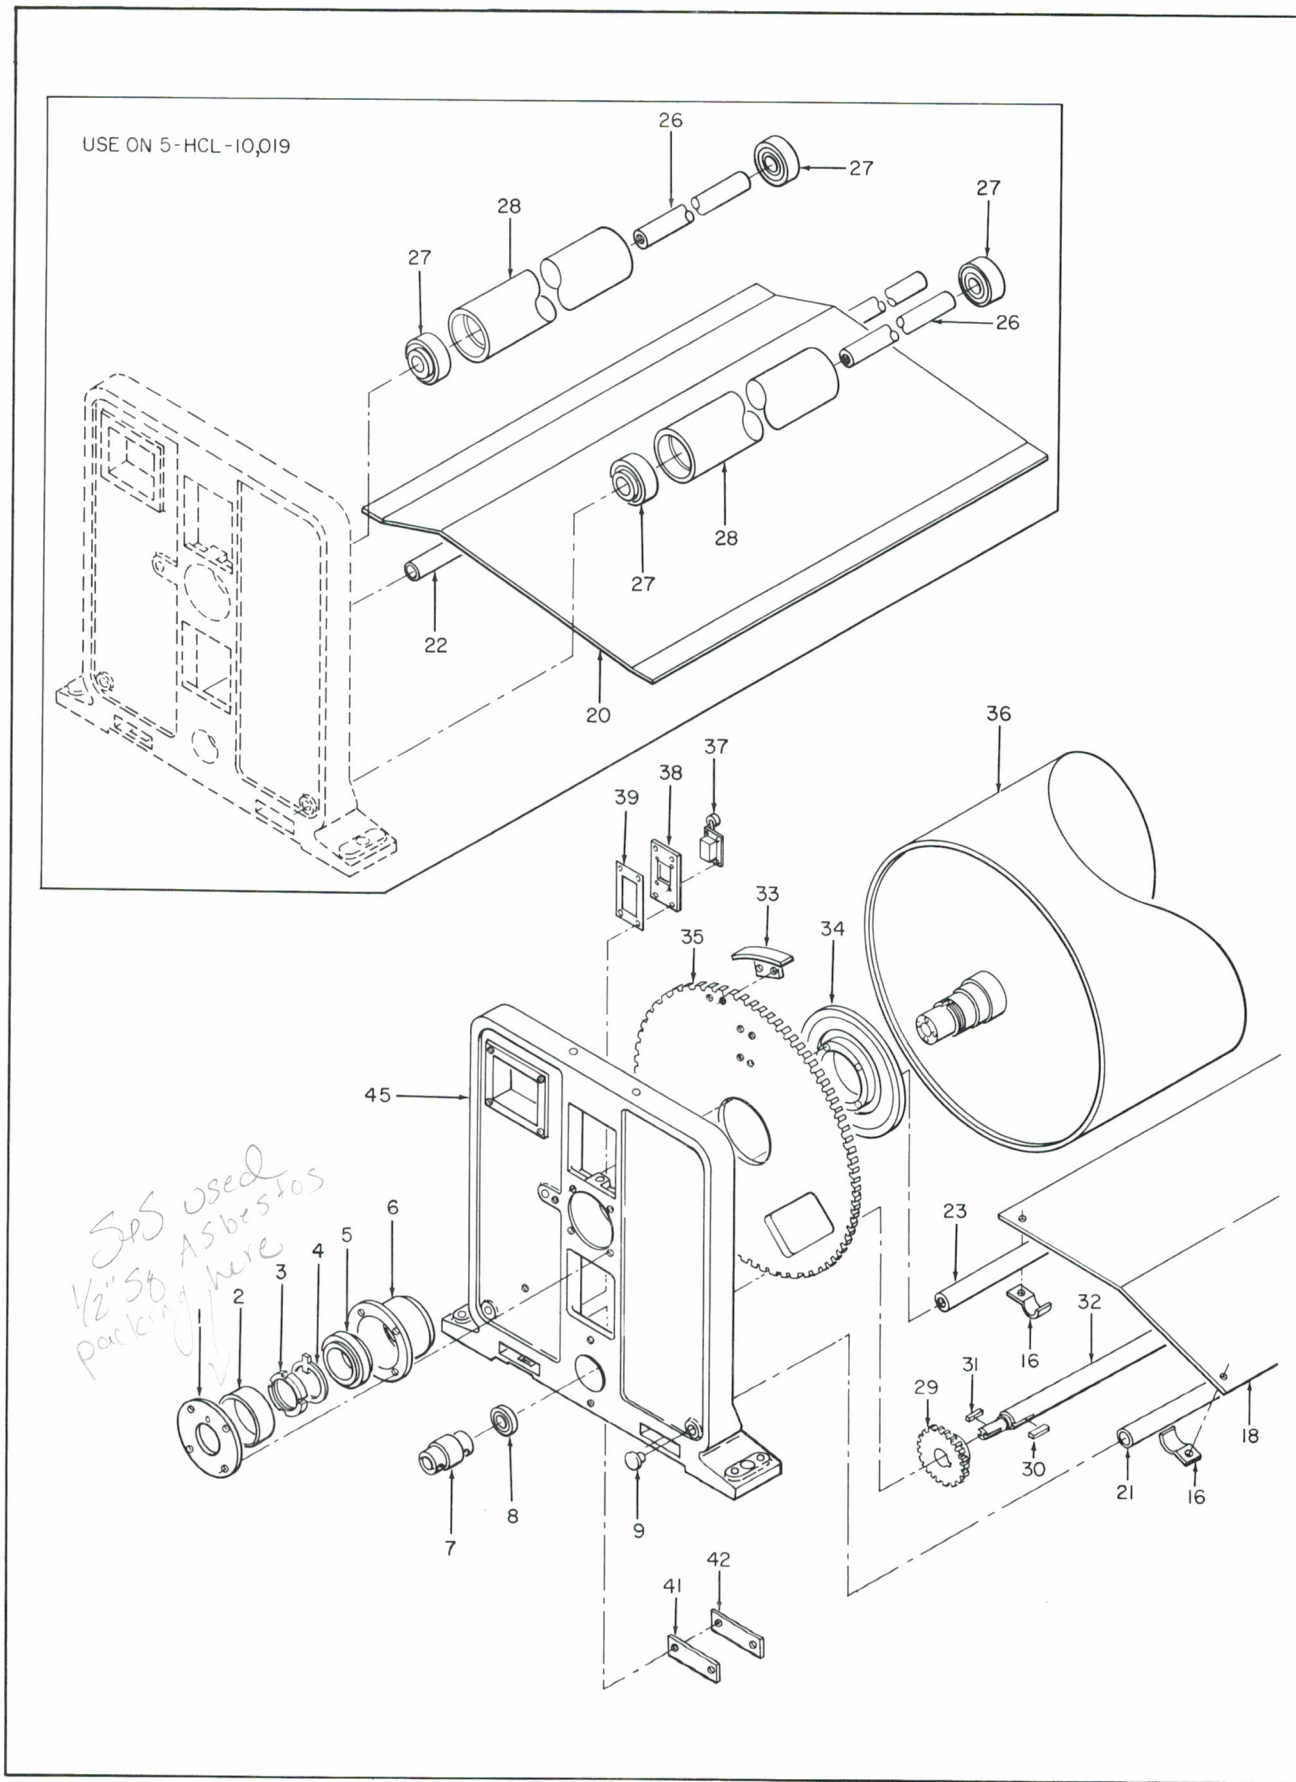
Frame and Drum Assemblies (Sheet 1 of 2)
